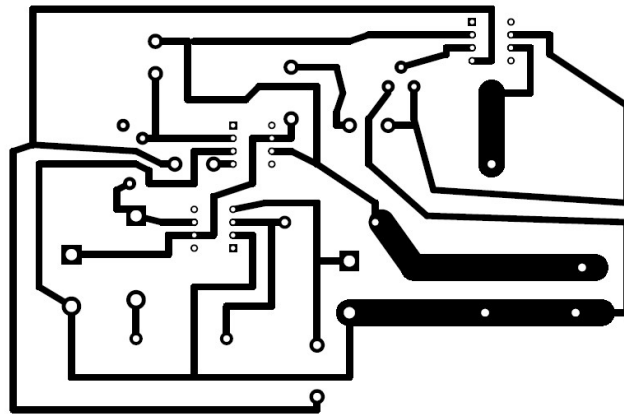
PCB layout (top copper layer) of PWM circuit
